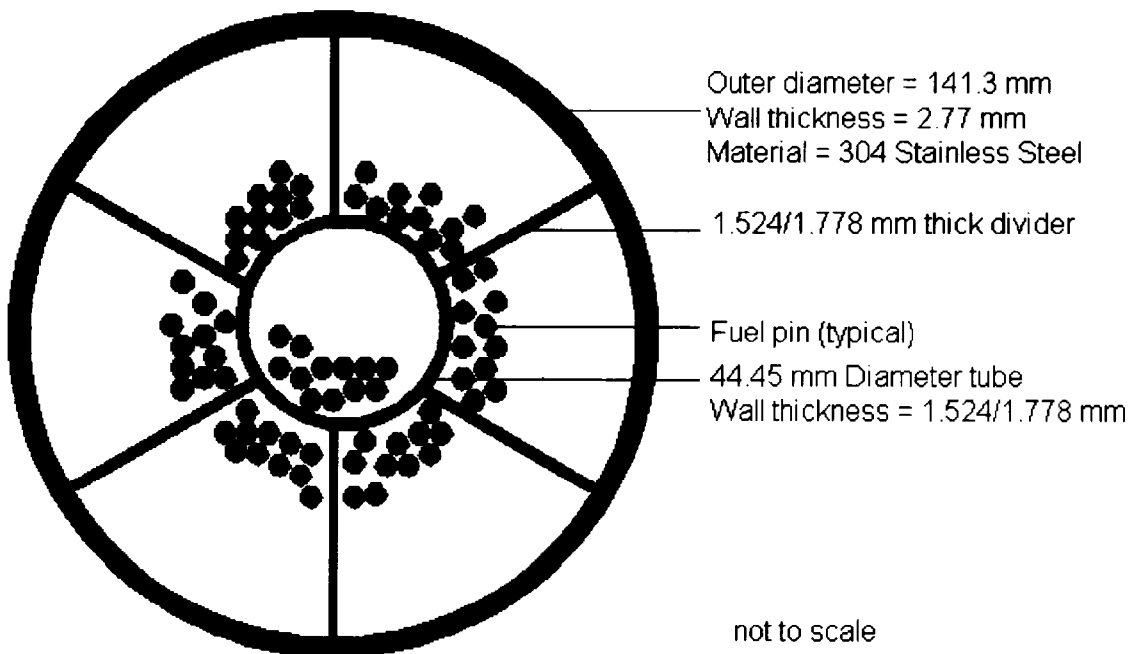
Cross-sectional View of Partially Loaded Ident-69 Fuel Pin Container
